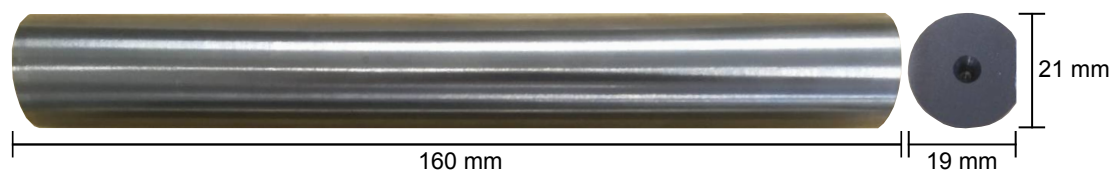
Machined Ti-5553 bar produced by FAST at 1000°C, prior to forging
